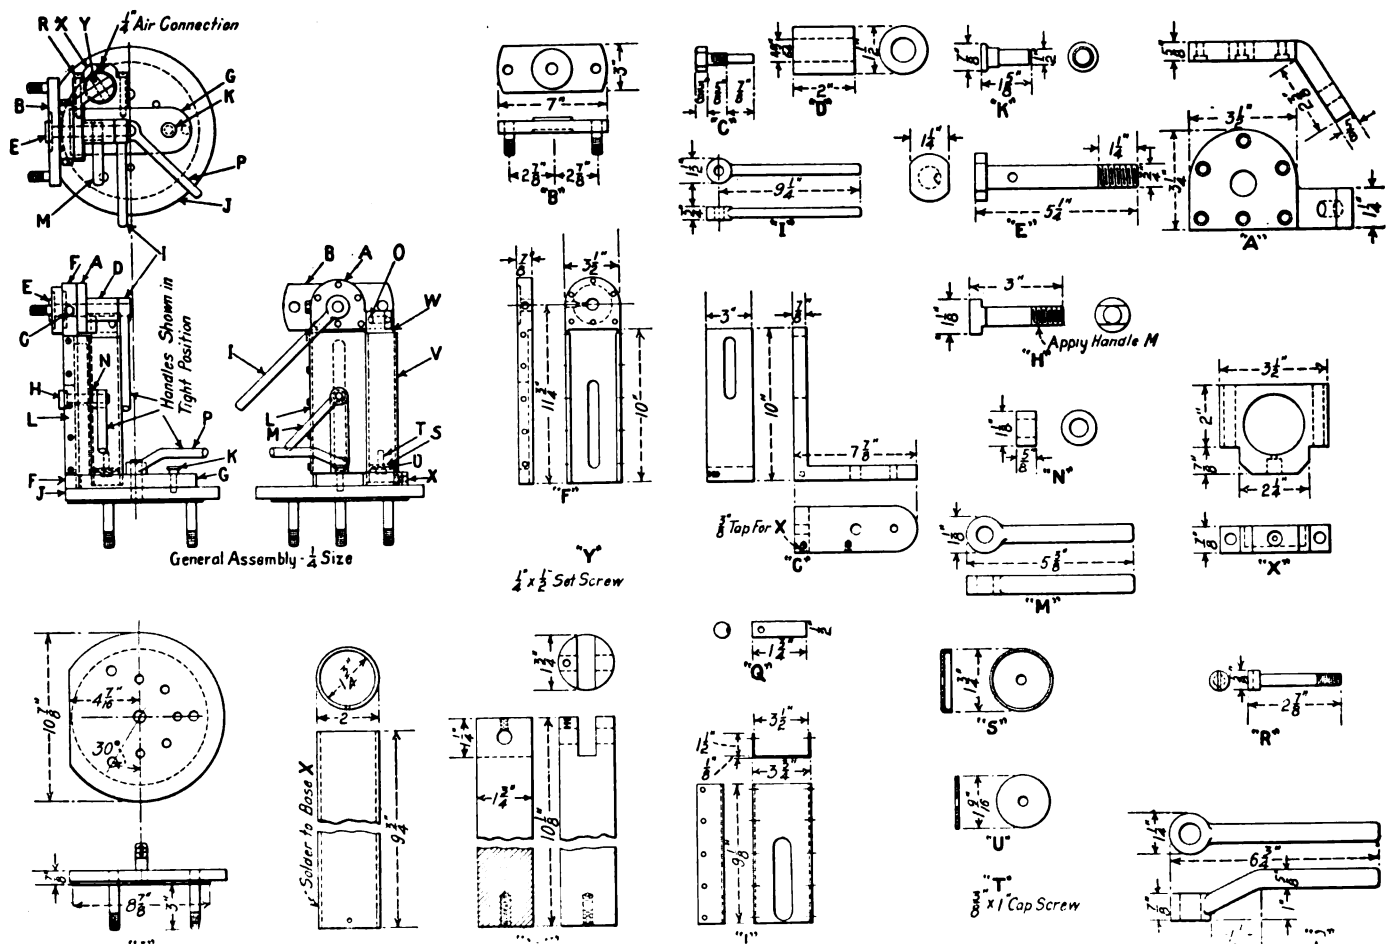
Fixture for holding distributing valves in any position when making repairs
